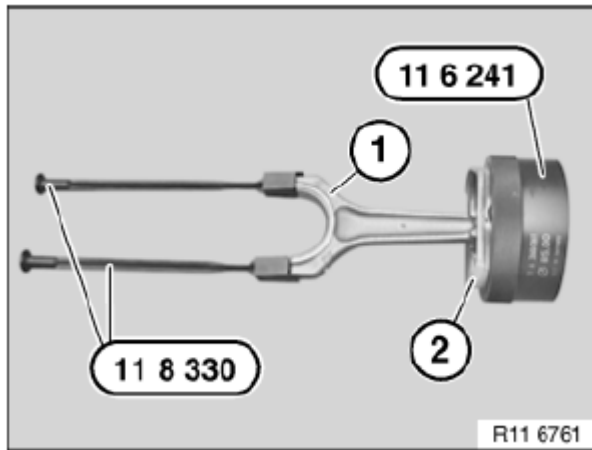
Identifying Special Tool (11 8 330), (11 6 241), Piston And Conrod
